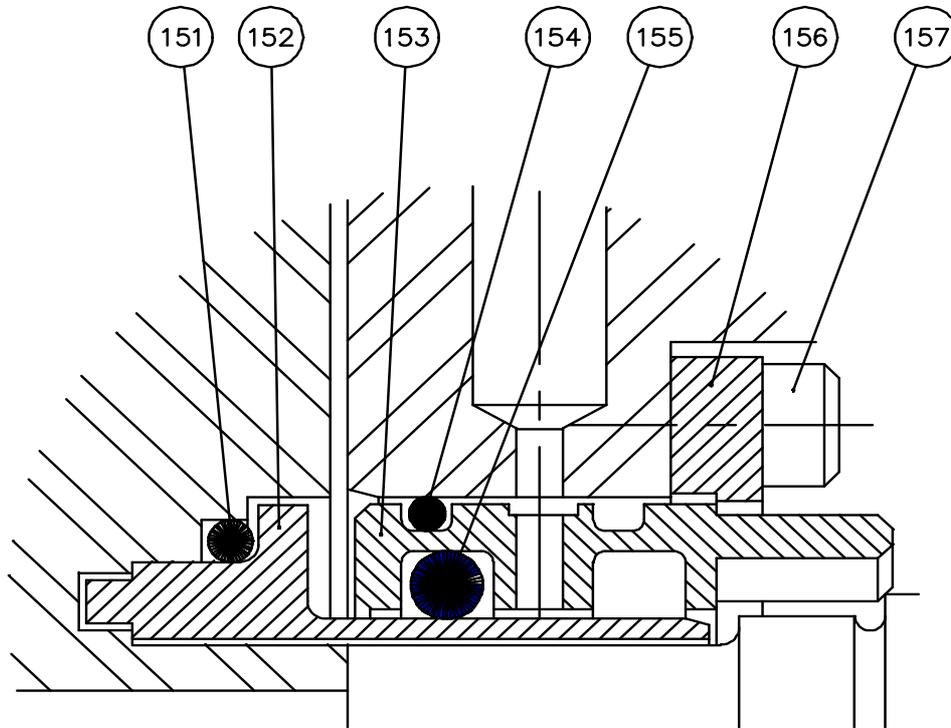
Use of Extraction Tool for the removal of Seal Faces.
